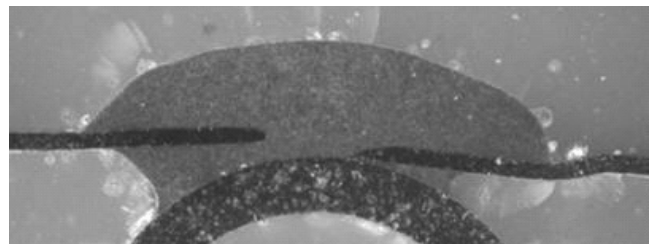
Macrostructure of pipe-flat foil GMA brazed joints with EcoBraz 38102 1.0 [mm] wire, brazing parameters – Table II, spec. design. 7PA
